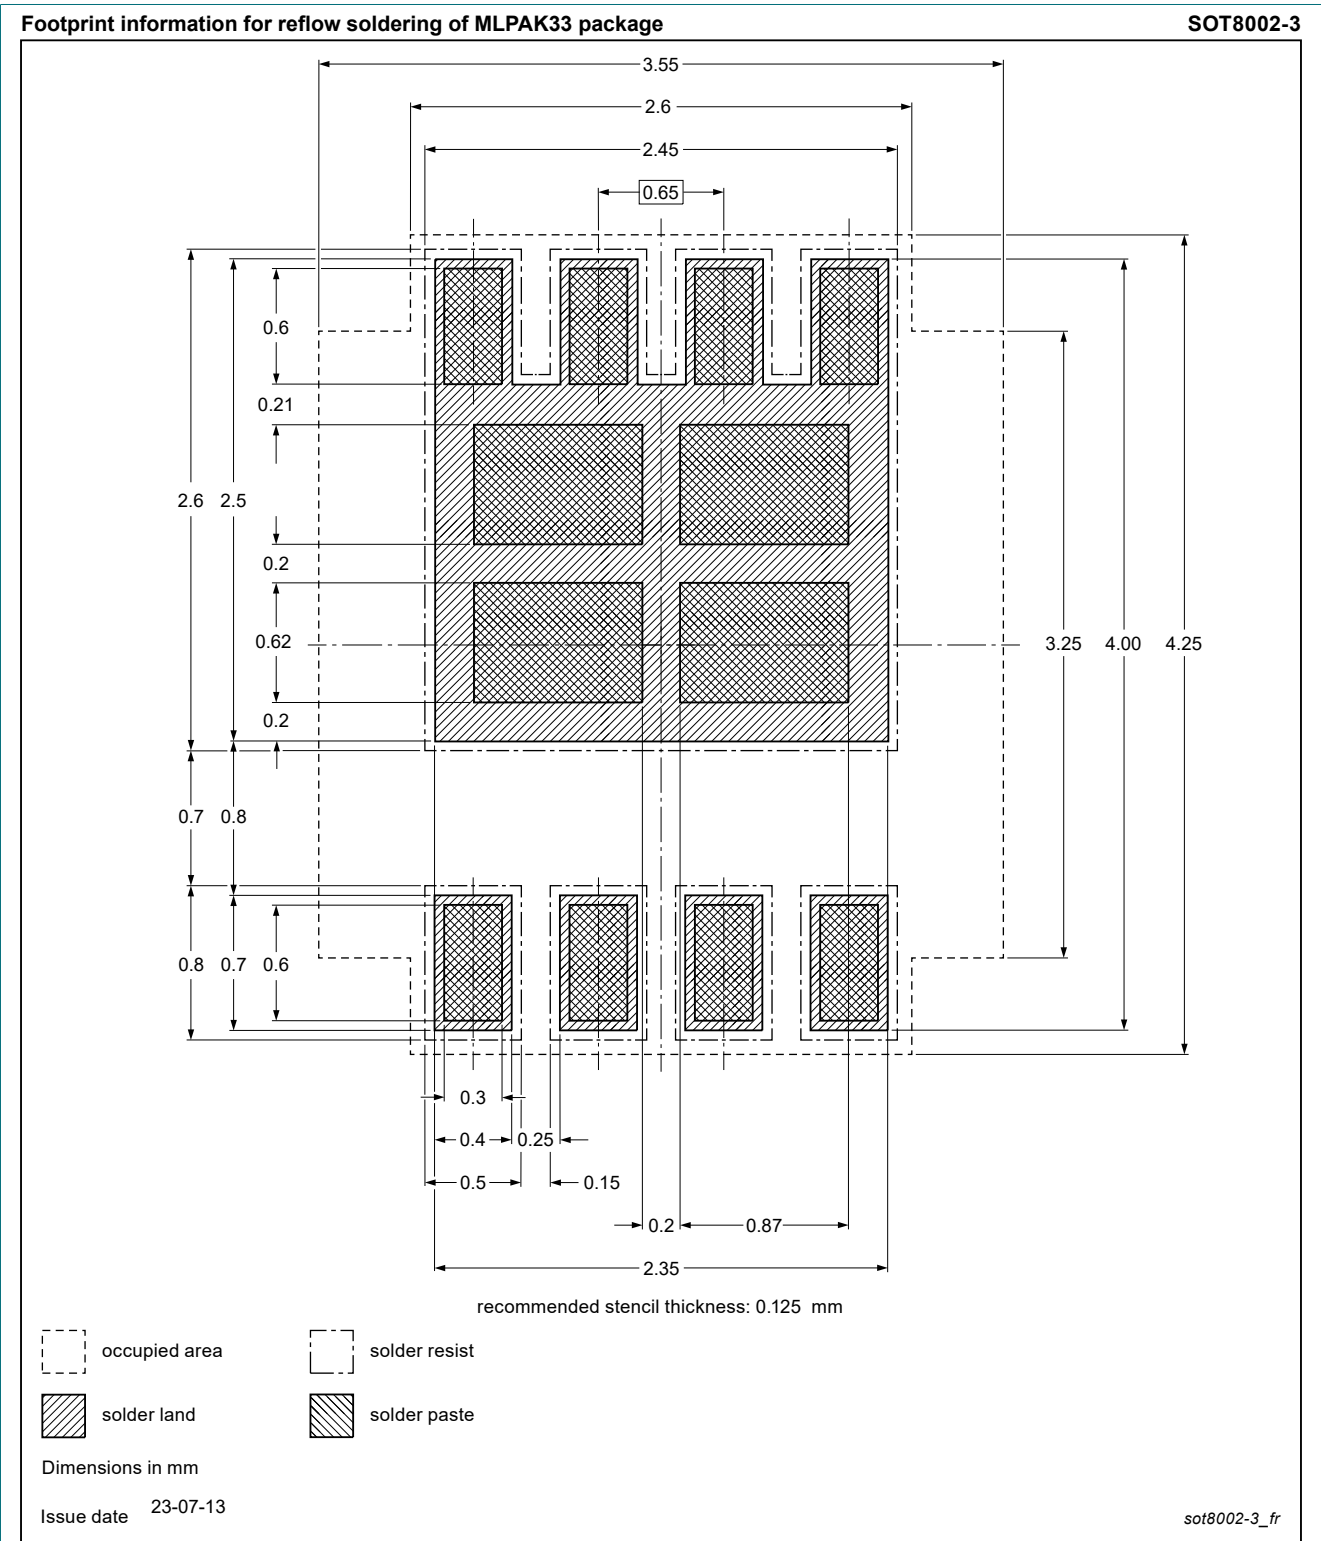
Reflow soldering footprint for MLPAK33 (SOT8002-3)
